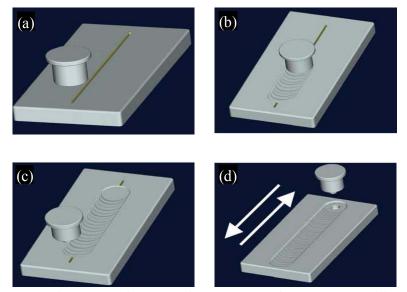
Surface composite preparation procedure. (a) Cutting grooves and inserting powder,(b) Use of a flat tool for surface repair; (c) Use of a tool with a fixed pin for FSP; and (d)Applying multiple FSP passes [9].
